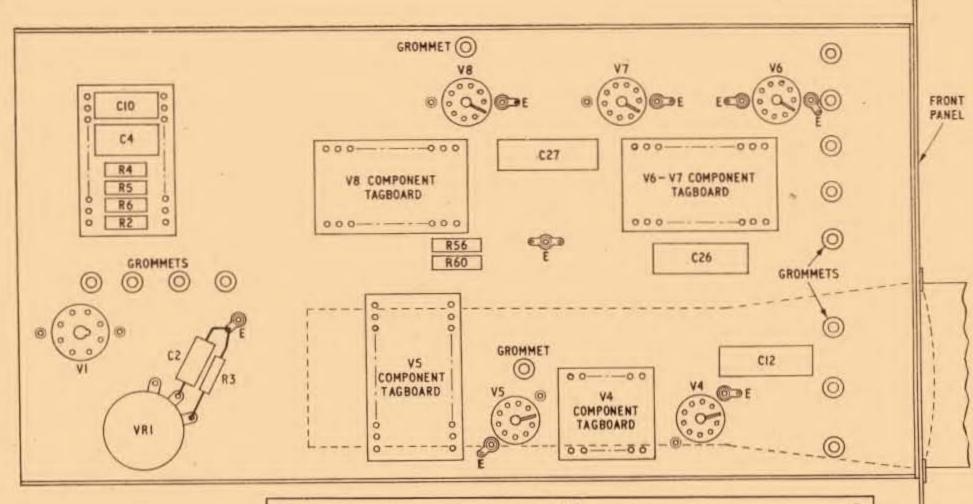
(above). Layout of tag boards and other major items underneath the chassis. Details of the component tag boards are given in Fig. 9
